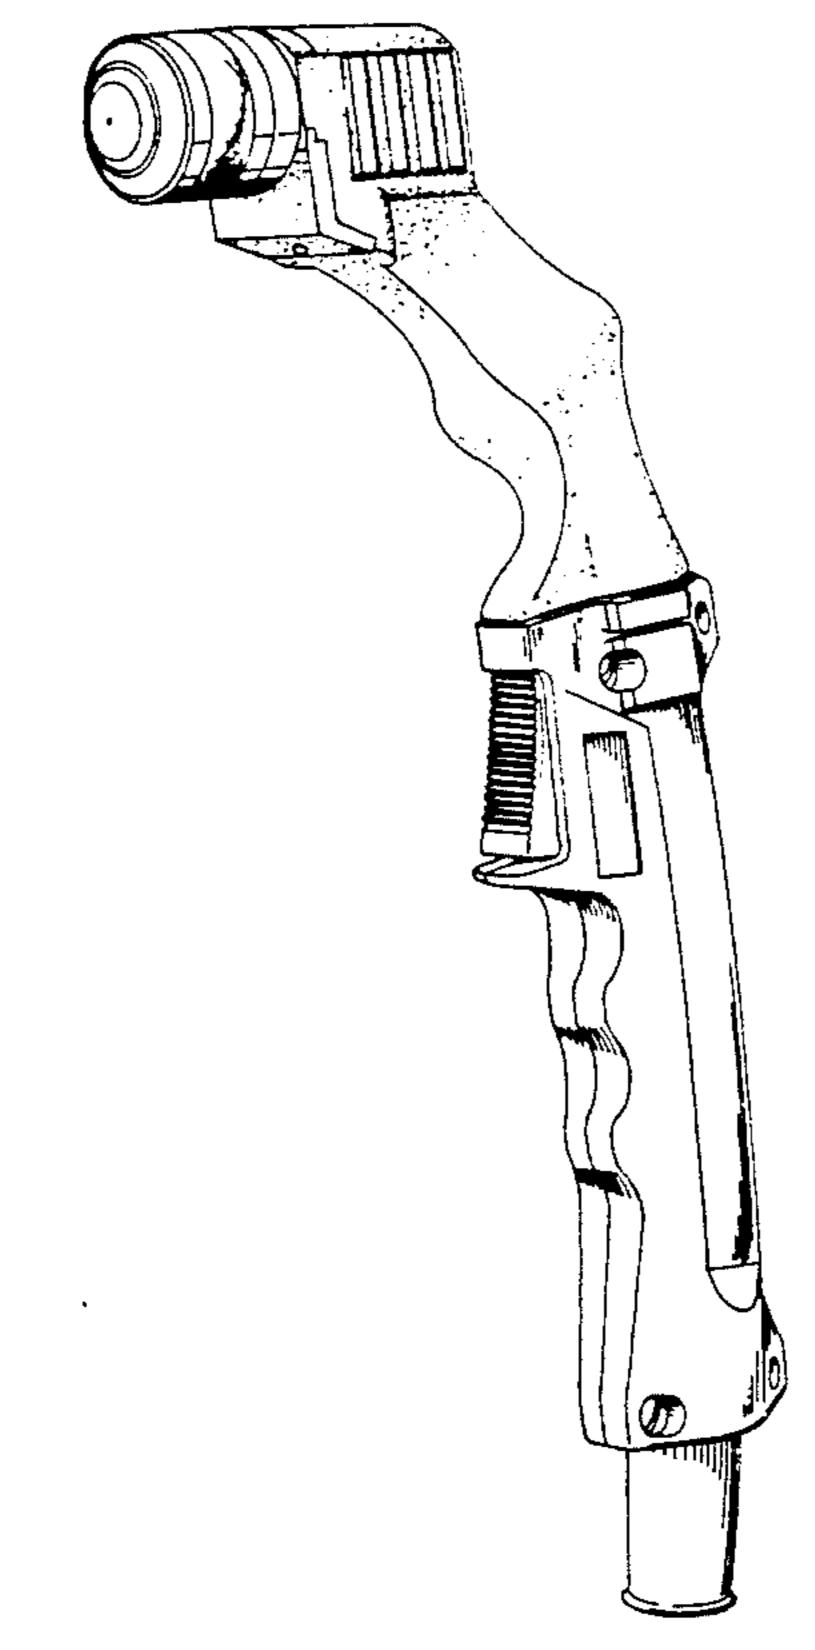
is a front elevational view of a second embodiment of our new design for a welding torch showing an alternative nozzle, the rear elevational views thereof being mirror images as shown in FIGS. 4 and 5;
